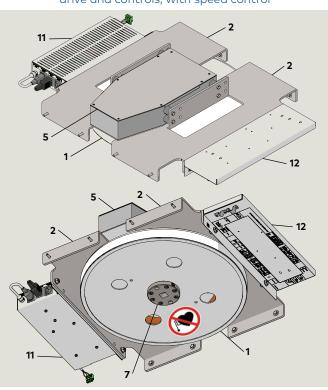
Top drive plate with speed control mounting, 24" spacing
